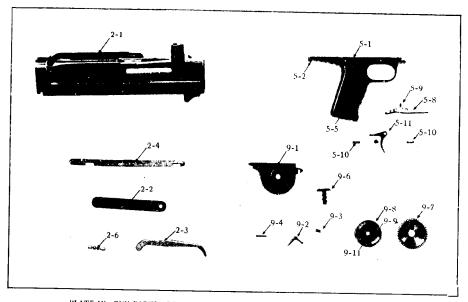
PLATE IV - GUN PARTS: RECEIVER CROUP, MAINSPRING, AND TRICGER MECHANISM
